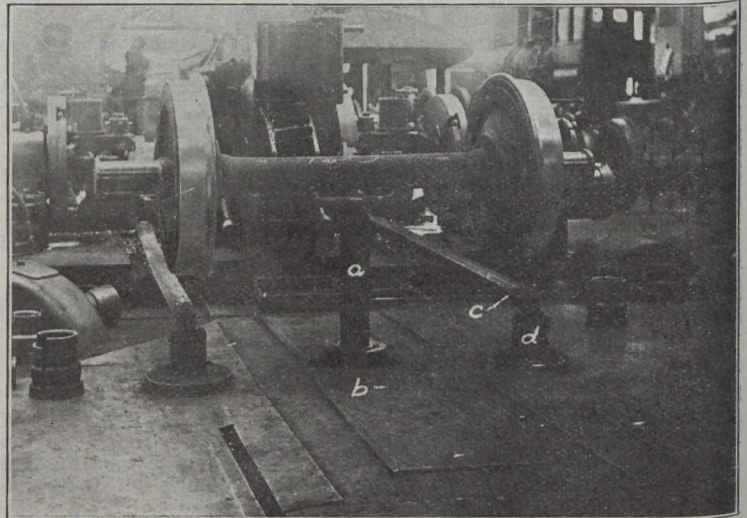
Mounting Wheels in Passenger Car Wheel Lathe.
